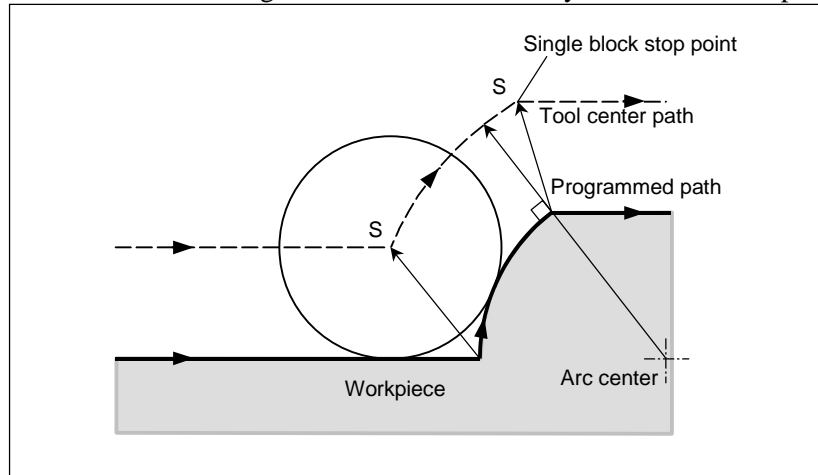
(b) Machining a step larger than the tool radius
